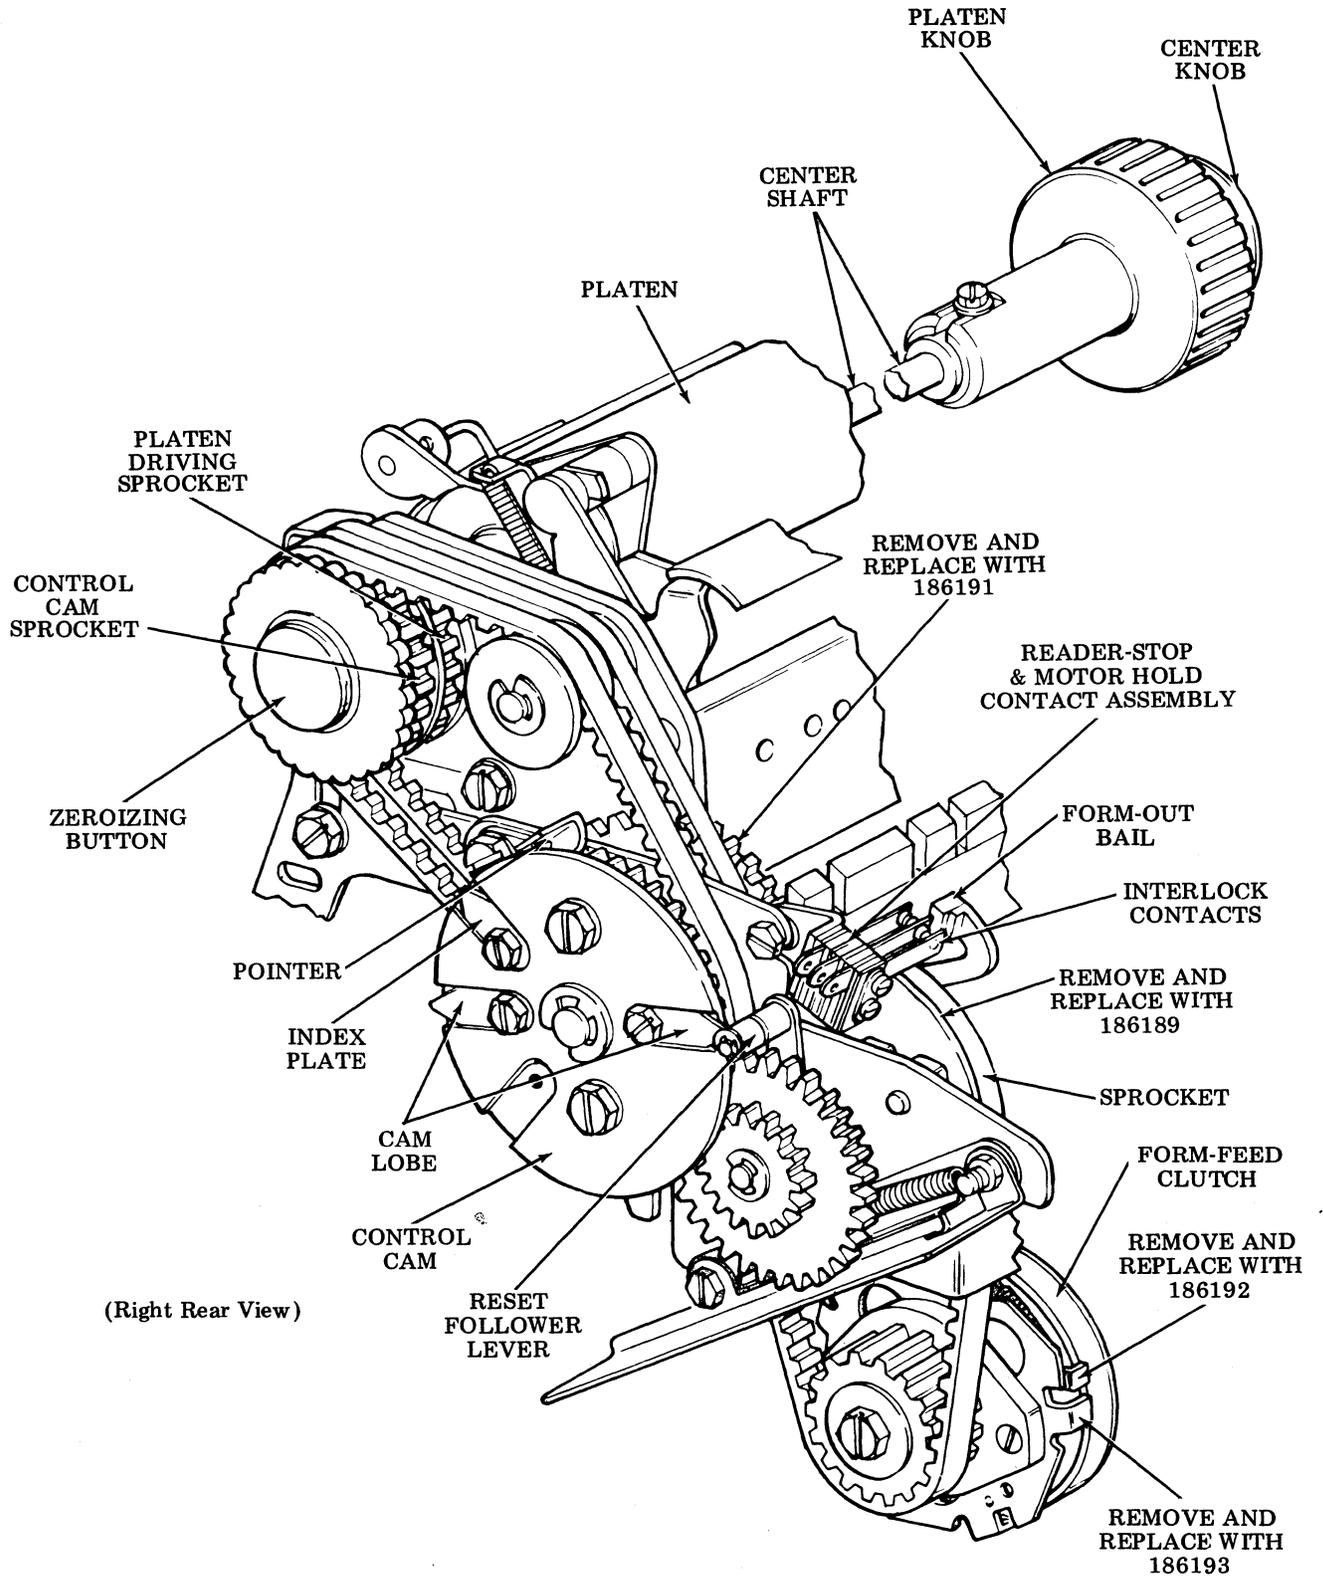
Platen Drive Mechanism (Sprocket Feed) (186136 Modification Kit)
